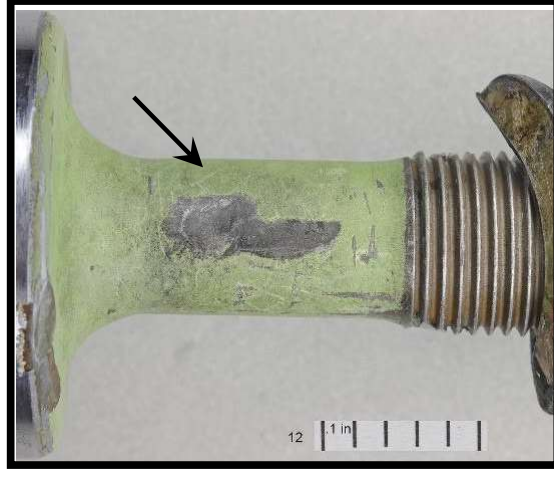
Detailed view of Tee Bolt shank-12 o'clock position.
